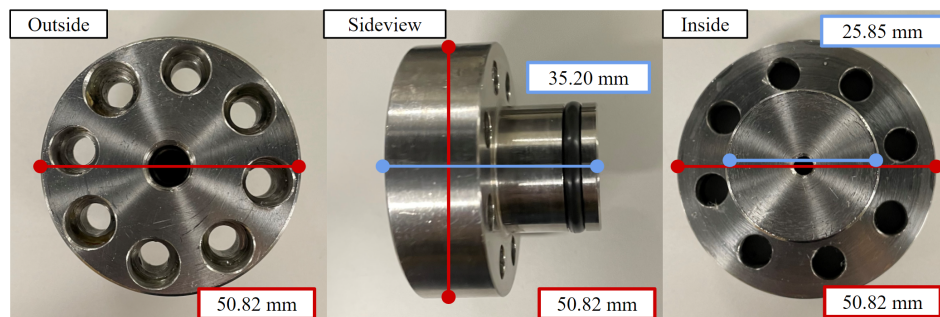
The pressure vessel piston cap that can be inserted into the bottom of the pressure vessel tube is shown from the outside (left panel), side (middle panel), and inside (right panel) with various dimensions in blue and red.
